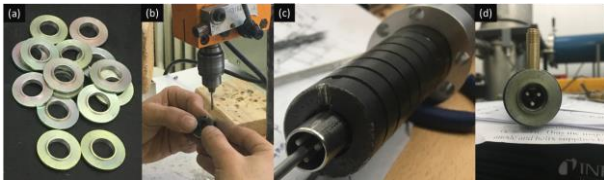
Production of periodic magnet system and opening of SMA connector slots using Alnico ring magnets. (a) pole pieces, (b) machining, (c) magnets assembly, (d) RF connector assembly.
